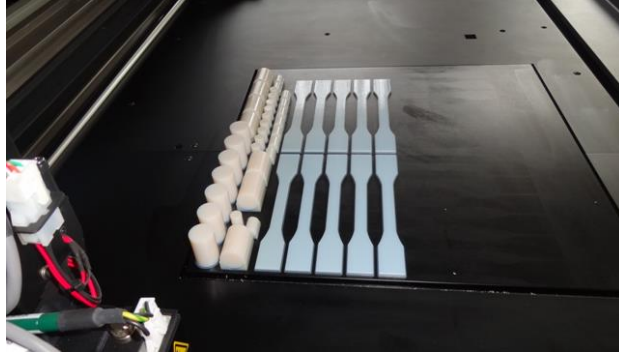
Printed specimens on a build tray of Connex 350 printer.
